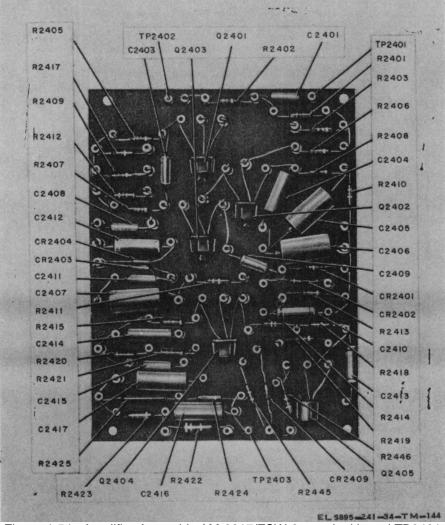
Amplifier Assembly AM-2817/FSW-8, terminal board TB2401, parts location.
